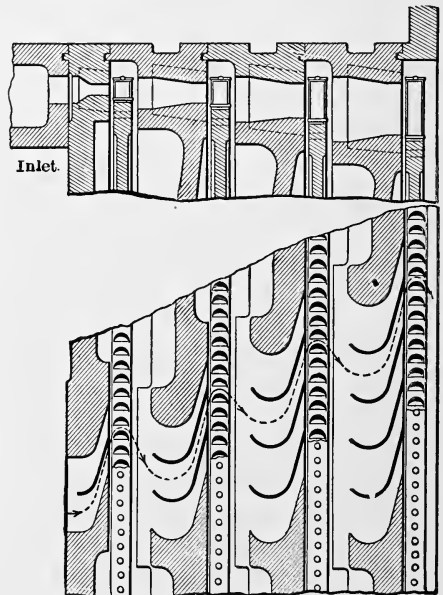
Arrangement of Vanes and Nozzles, Kerr Turbine.
